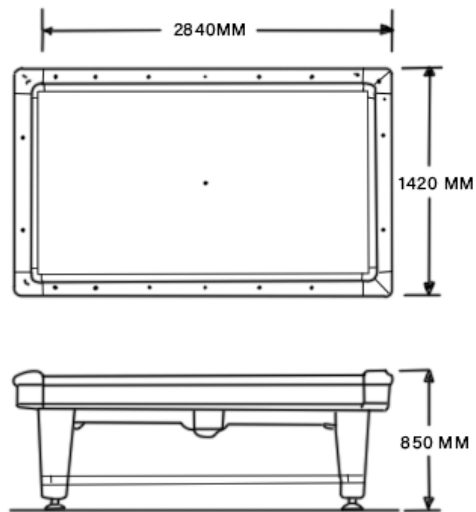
Dimensions and Details of a Typical Carambole Billiard Table
